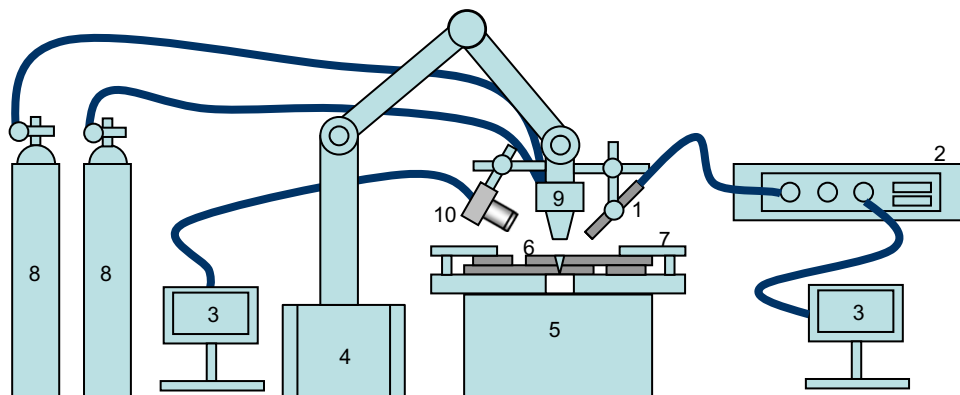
Schematic of robot-controlled laser welding equipment with a spectrometer and a CCD camera monitoring system (1-colimator lens, 2-spectrometer, 3-computer, 4-robot control system, 5-worktable, 6-specimen, 7-clamp, 8-shielding gas cylinders, 9-laser welding head, and 10-CCD camera).
